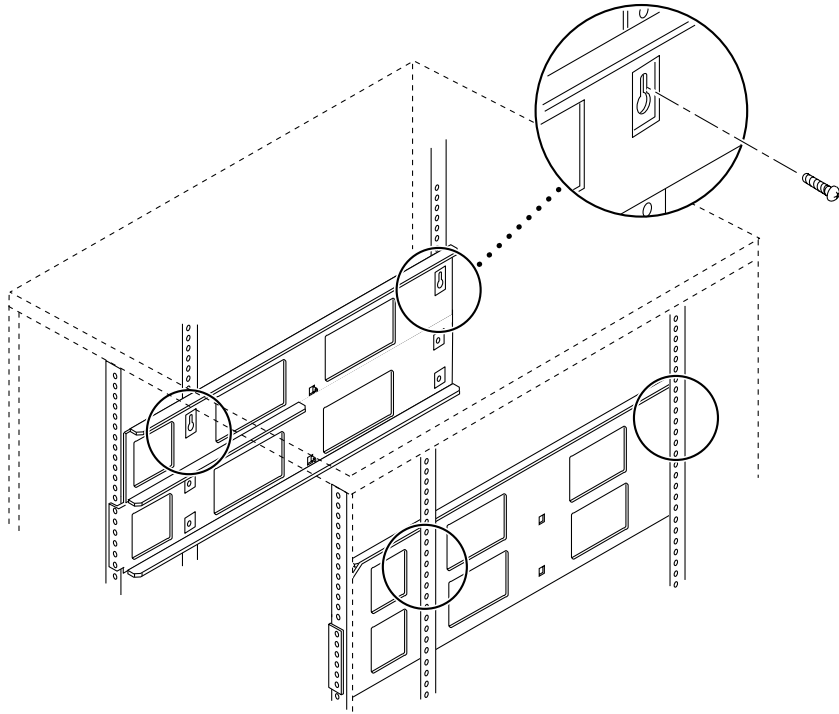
Positioning a Dual-Tray Rail and Threading Screws
